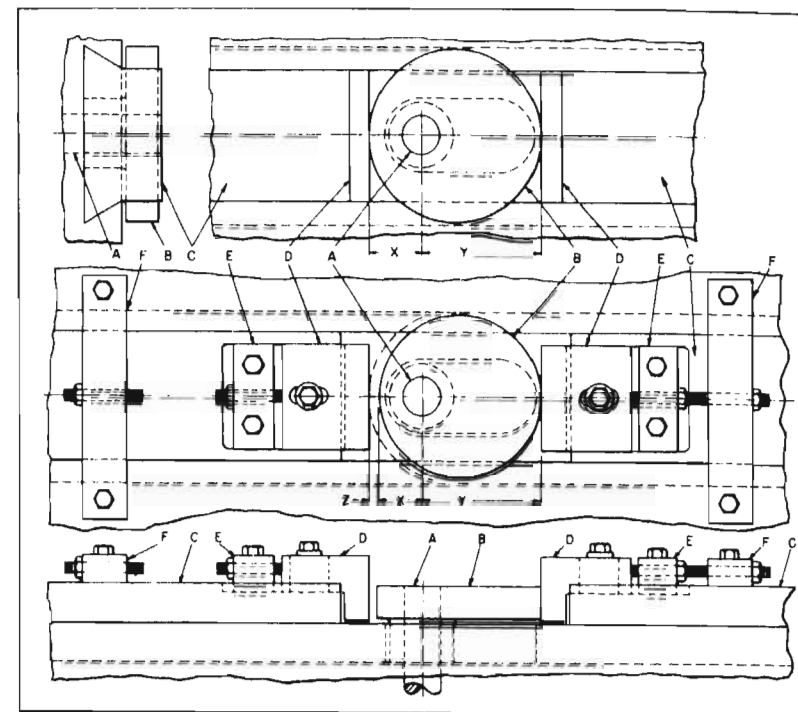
In original design of reciprocating mechanism (top), the high point of eccentric *A* wore rapidly. In modified design (center and bottom), contact plates *D* are adjustably mounted on slide *C* to provide take-up for wear.
